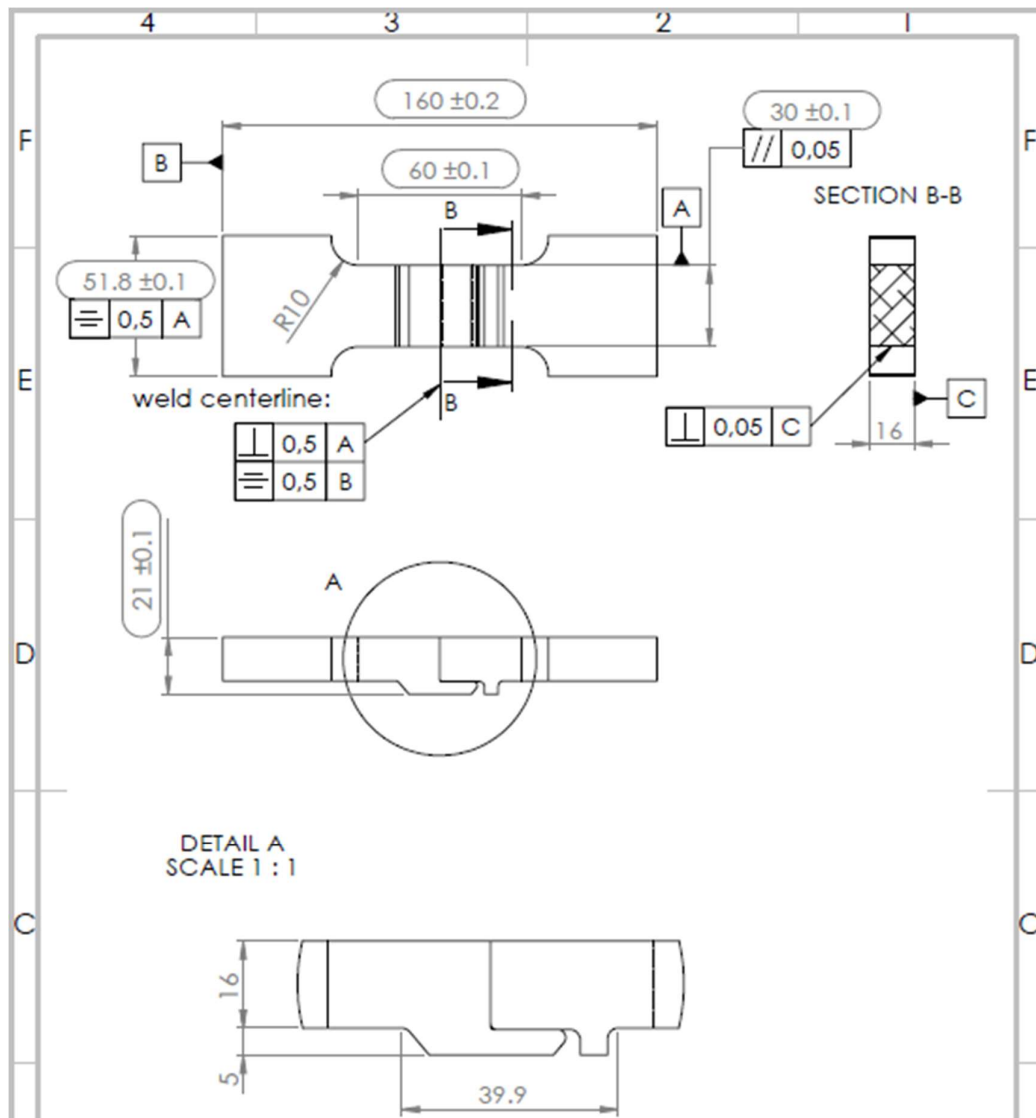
Dimensioned drawing of 17 mm weld thickness tensile specimen
